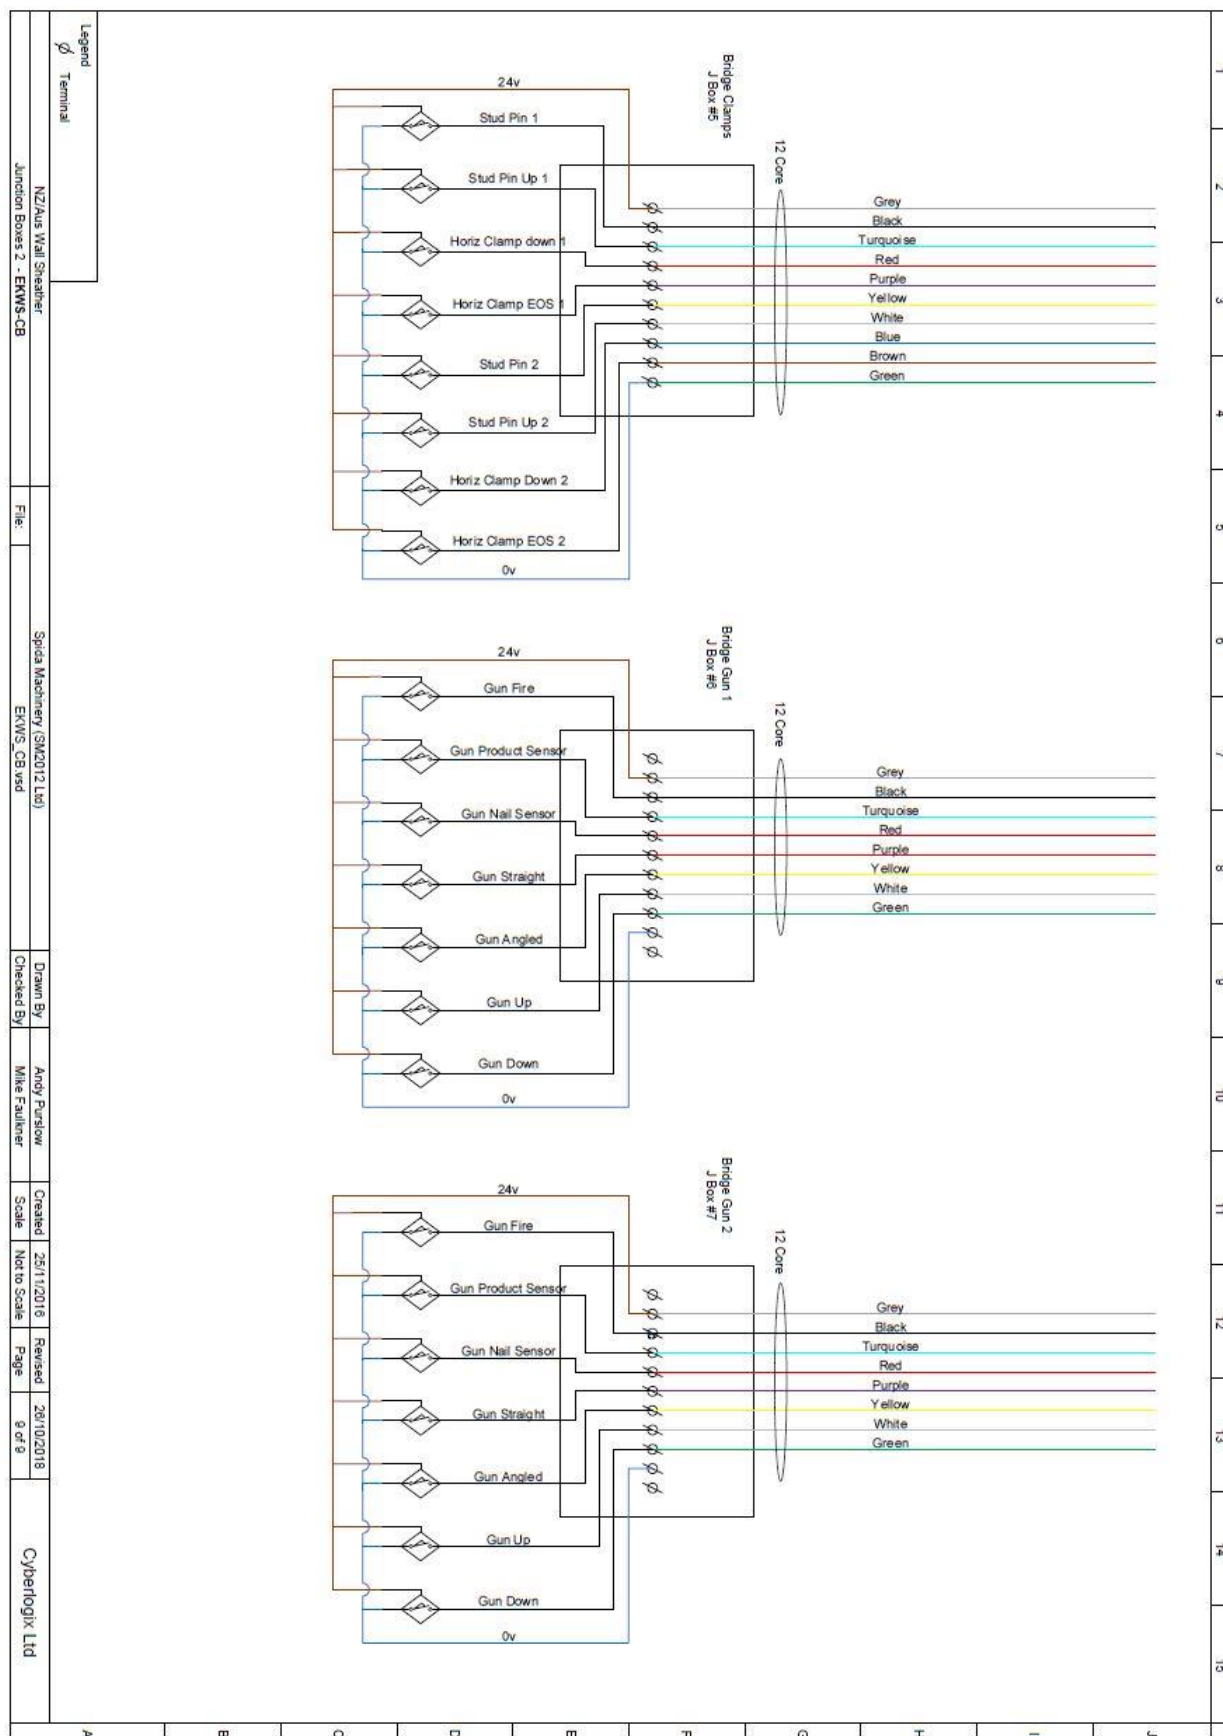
, Spida Auto Sheather Electrical Drawings NZ/AU part 9
